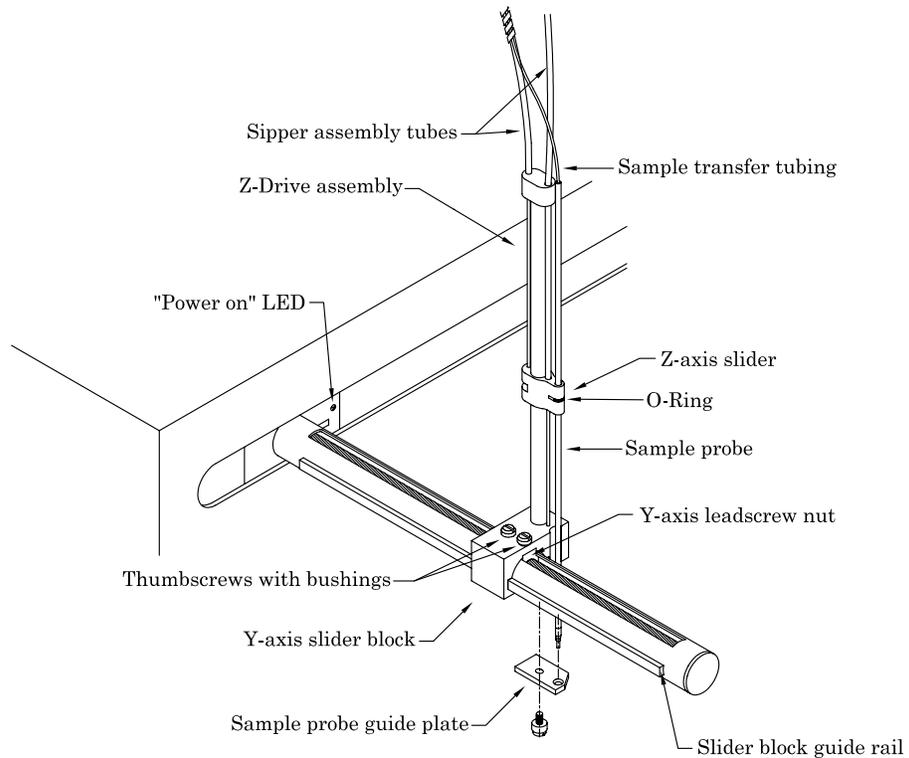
Z-Drive Assembly on Auto Sampler Arm.
